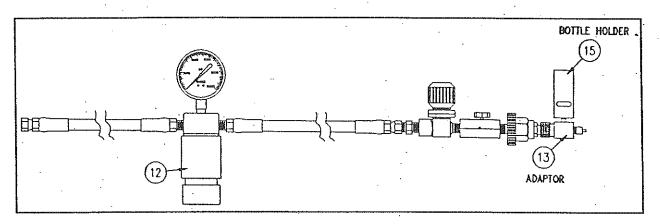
BOTTLE HOLDER INSTALLATION
